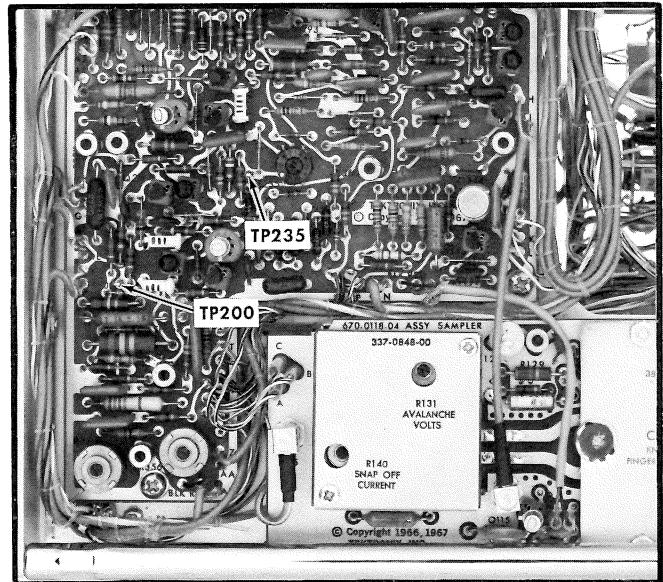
Location of test points TP200 and TP235, Vertical Circuit board assembly.
